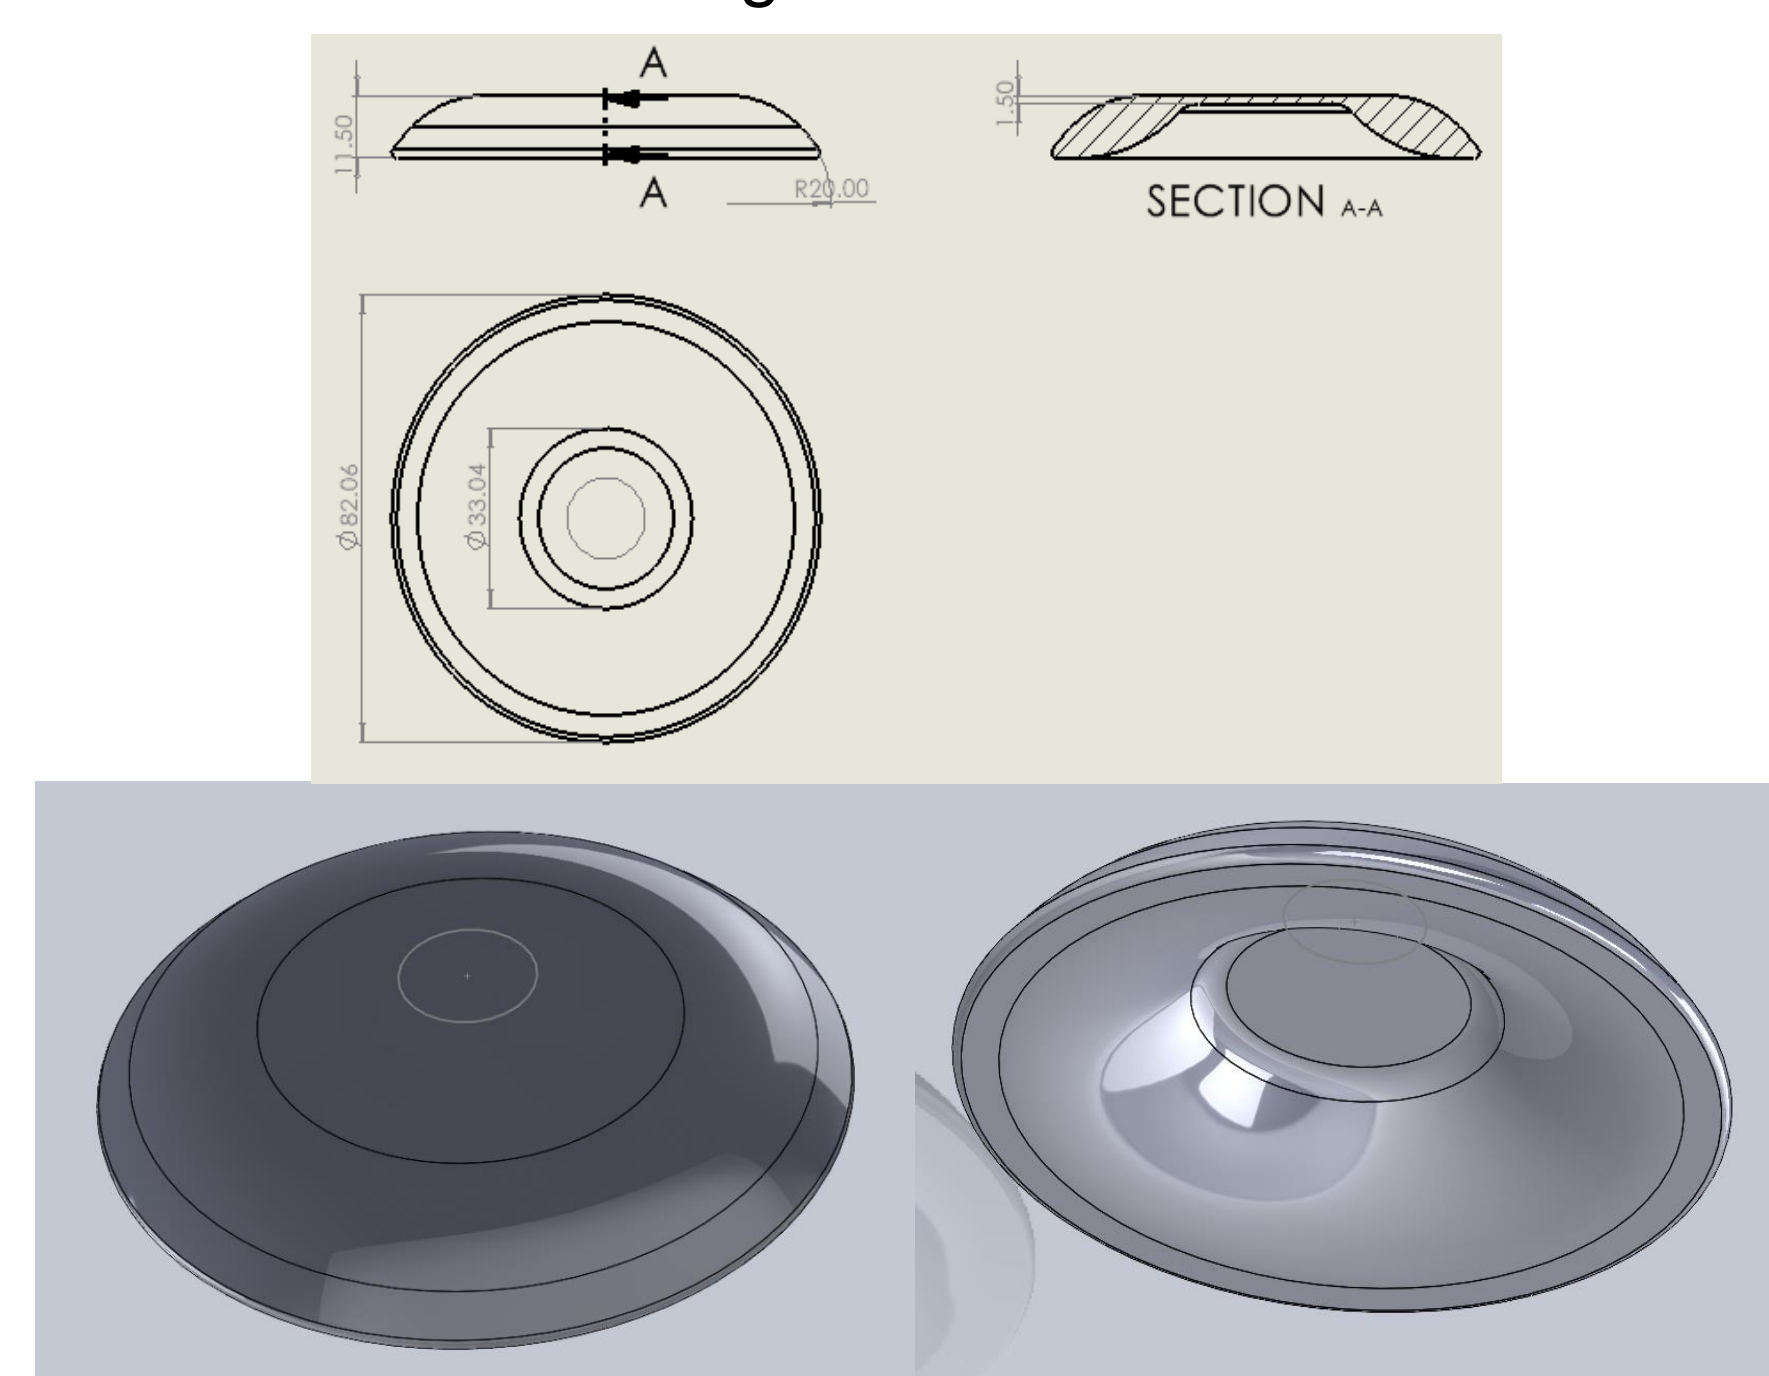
Dimensioned Drawing and Top/Bottom Views of 2<sup>nd</sup> Iteration
